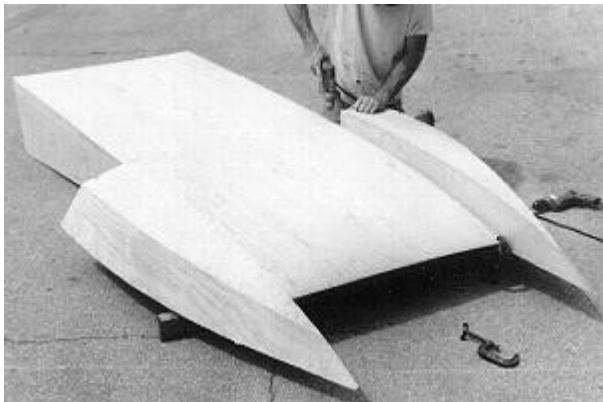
The 1/4" plywood bottom planking is ripped to the proper width and fitted between the planking-runner assembly. Clamp the member at the bow and bend aft, driving several locating screws to position the plywood before permanently fastening.
